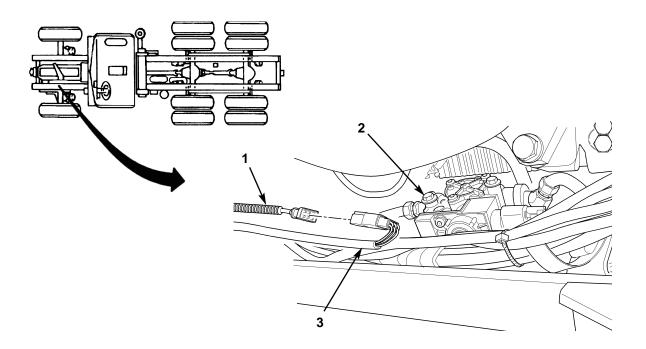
Disconnecting Wheel Sensor Cable at Front Modulator.
